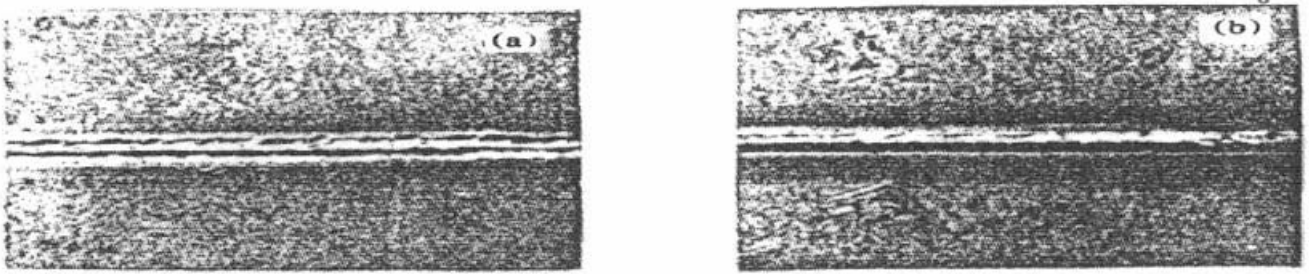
Top view of upper (a) and lower surfaces (b) of a laser weld in 45# steel with a 5 kW CO₂ laser.
